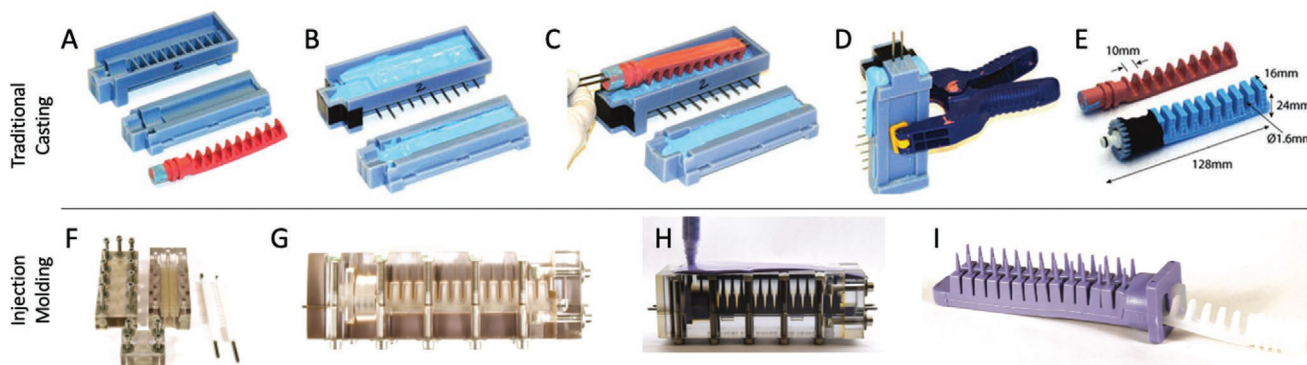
Comparison between traditional casting methods and injection molding methods for a soft gripper. Traditional casting: A) Top and bottom molds with a soft core, B) filling both molds with Smooth-Sil 950 silicone, C) insertion of the soft core with rods into the silicone, D) clamping and then curing, and E) completed actuator. Injection molding: F) Top, bottom, and cap mold with soft cores; G) soft cores inserted into mold with screws clamping all parts together, H) injecting Smooth-Sil 945 silicone into the mold using a static mixing nozzle, and I) final gripper with soft core removal showing untrimmed sprue material.
